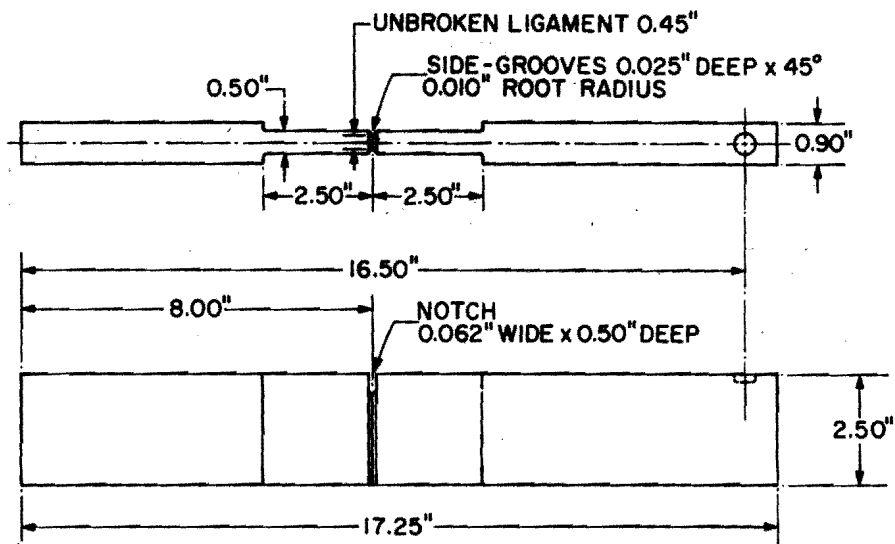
Details of the NRL single-edge-notched (SEN) cantilever fatigue specimen with side-grooves
